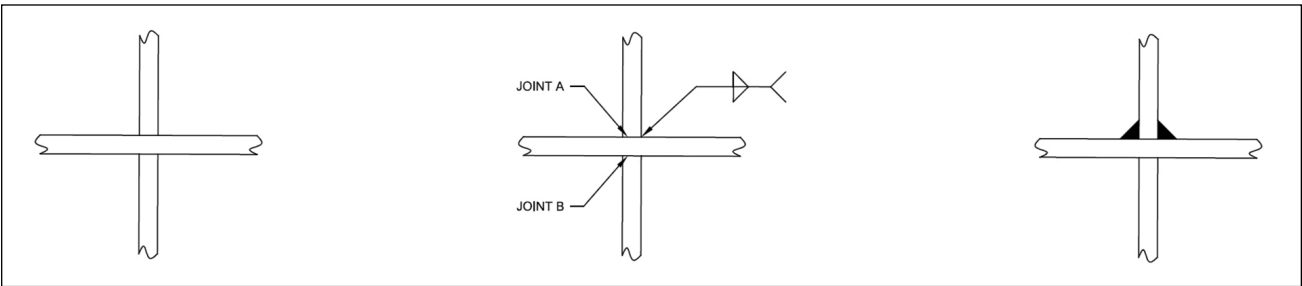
Opposite T-joints with welding symbol specifying a double fillet weld.
